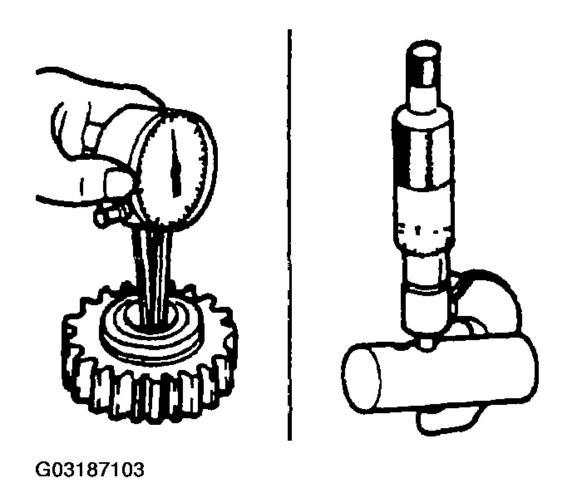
Measuring Clearance Between Reverse Idler Gear Bushing & Shaft Courtesy of MAZDA MOTORS CORP.
